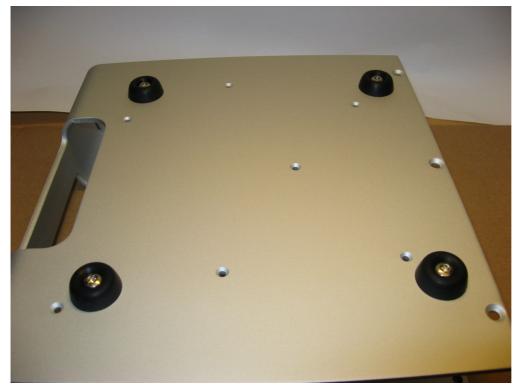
Mount the rubber feet's using the four screws as shown in the picture.
